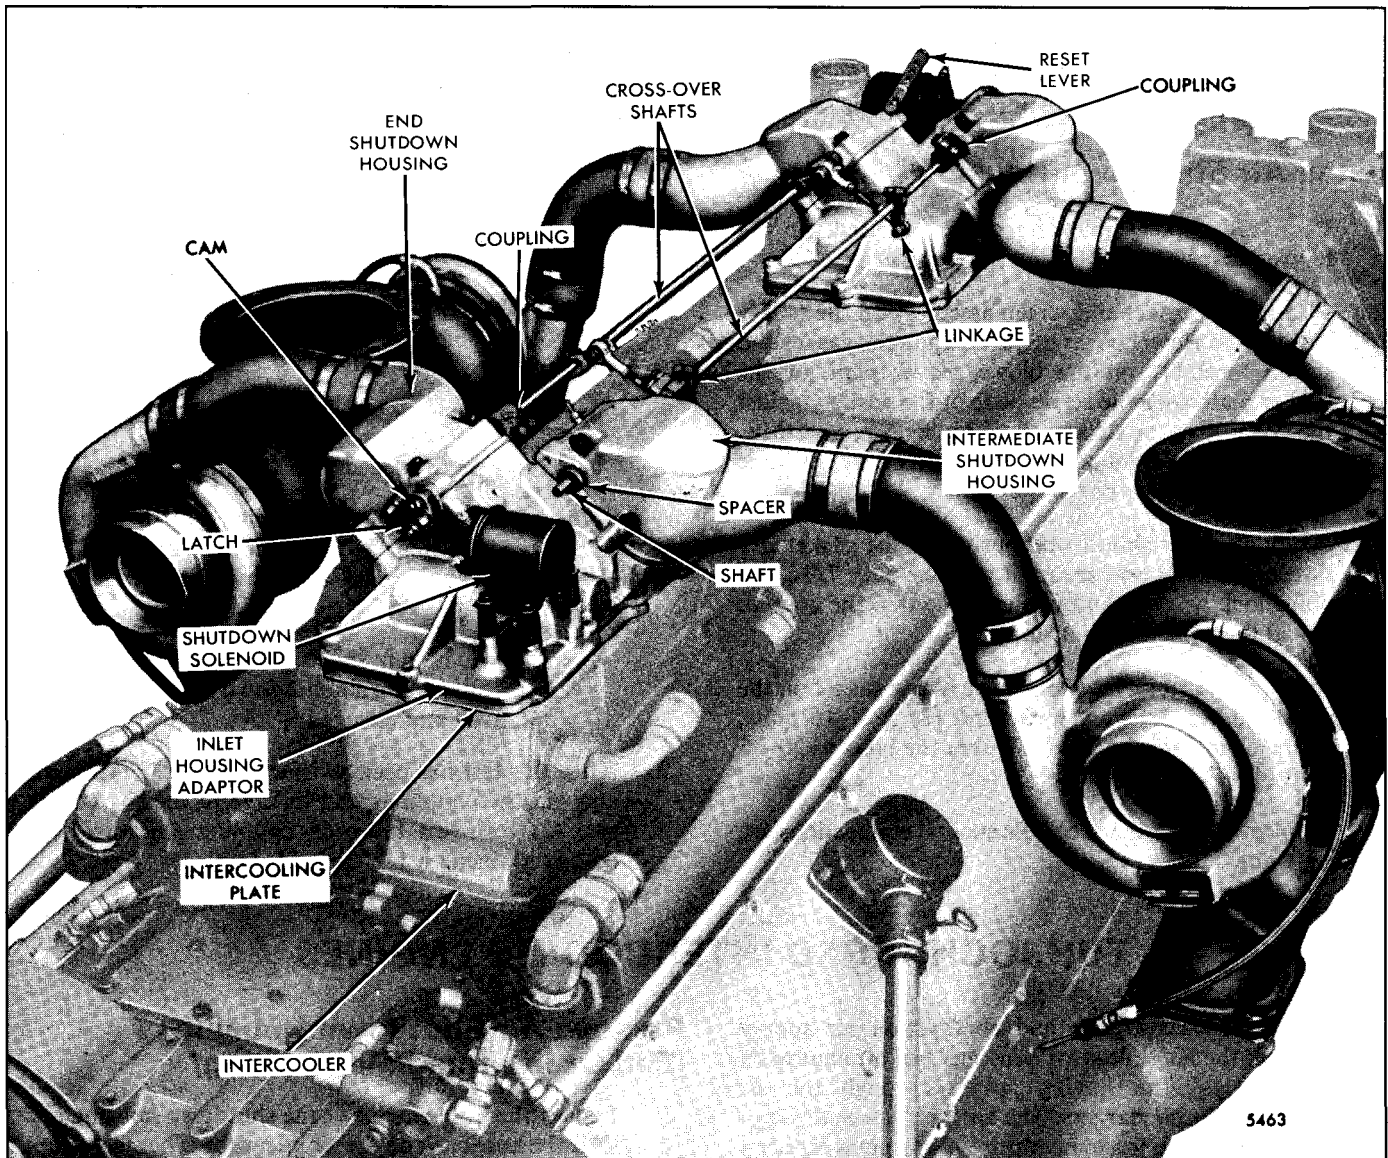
Intercooled Engine Air Shutdown Housing Mounting
